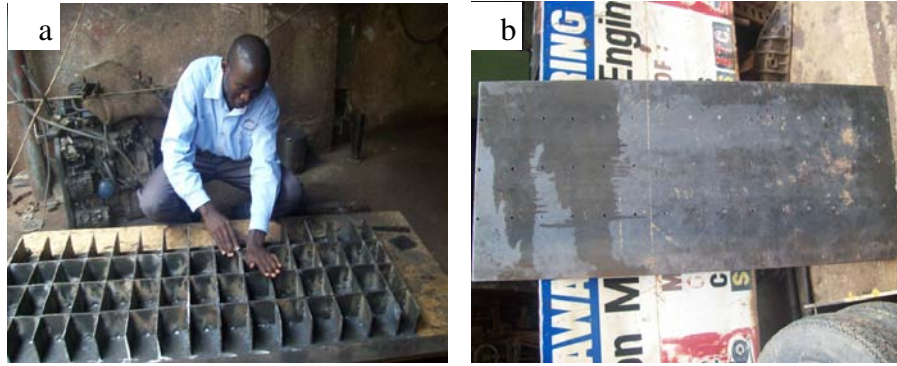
Filing of Honeycomb surface and the completely drilled bottom plate:
